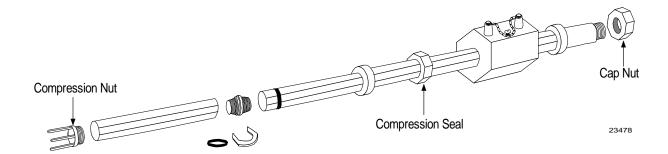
Support Tube Assembly with Stuffing Box, Exploded view
